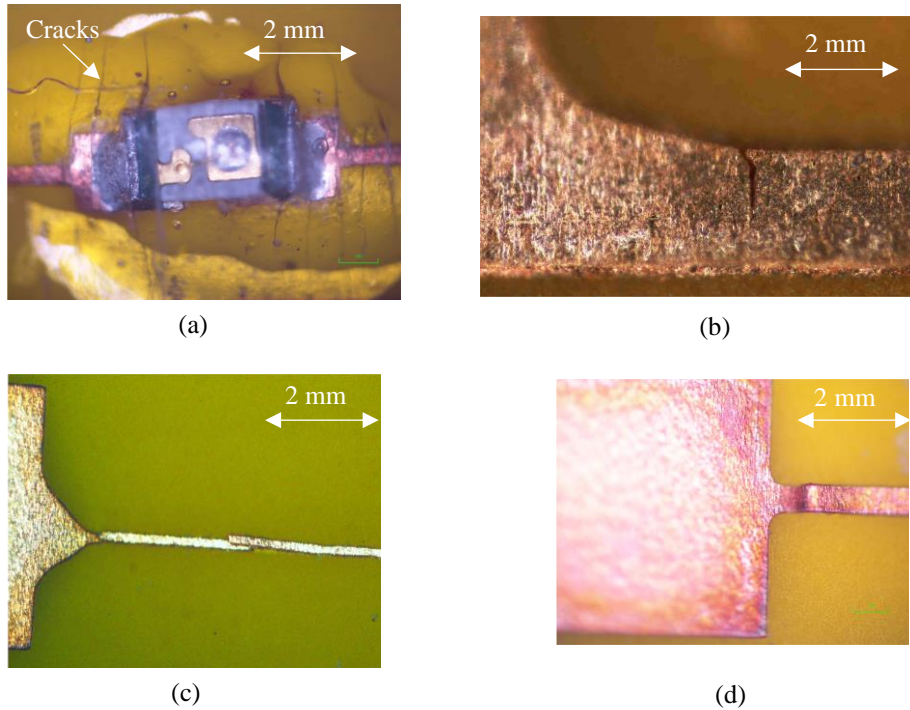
Post-bending failure modes of circuits (a) Cracks forming on glob-top encapsulation at 1.5 mm bending radius, (b) micro-fractures forming on 150 μm wide copper tracks close to the bond pads, (c) flaking of 80 μm copper tracks due to adhesion failure and (d) buckling of 150 μm wide copper track due to adhesion failure.
